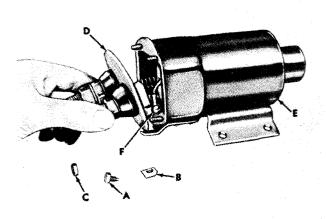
DISASSEMBLING INTERNAL PARTS OF DRIVE CLUTCH ASSEMBLY.
